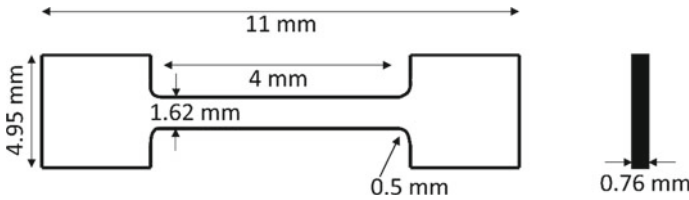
Geometry of flat specimen (ss-3 type) having 4 mm gauge length
